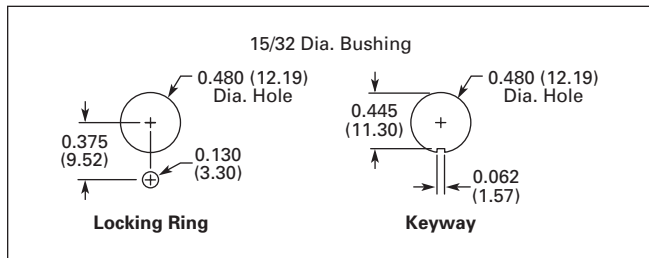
Toggle Switch Panel Cutout Dimensions in Inches (mm)
